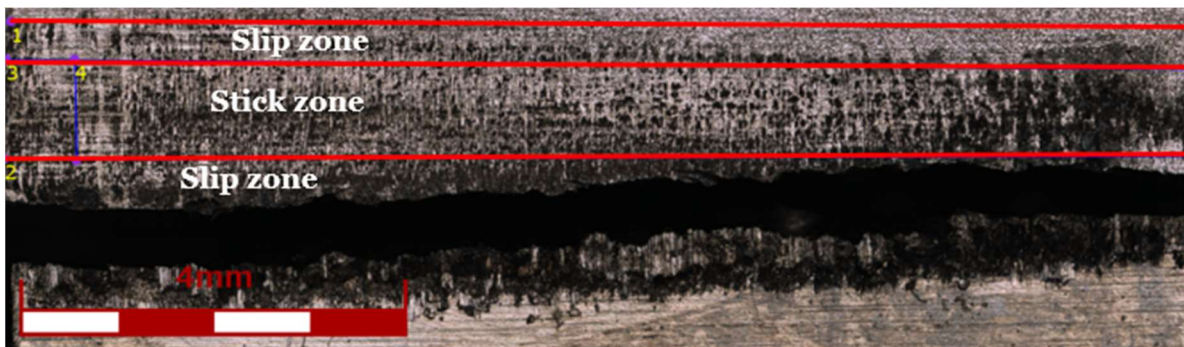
Fretted area of the specimen under the contact of the cylinder pad with radius  $R=50\text{mm}$ .
